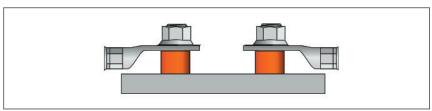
HV BM 1.2+S, power cable HV+, fastening the ring terminals with the M8 nuts
